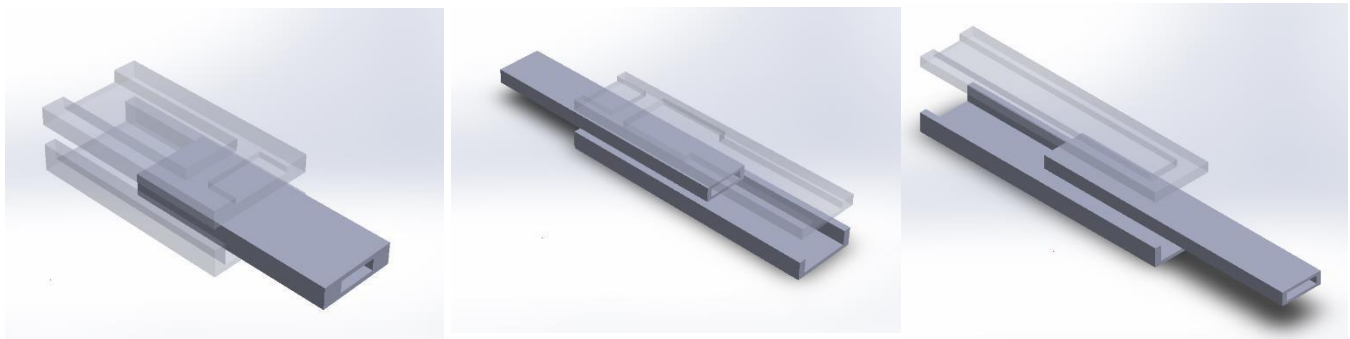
(Left to right) Exploded view of redesigned finger guides for middle phalanx, exploded view of redesigned finger guides for proximal phalanx, exploded view of redesigned finger guides for metacarpals.
